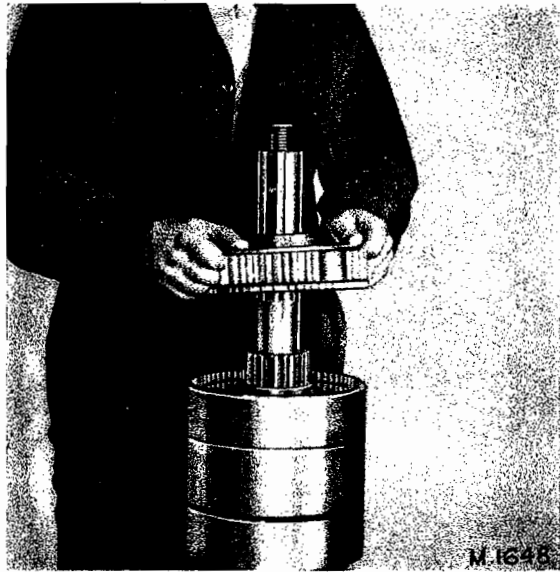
FITTING THE SUB-ASSEMBLY OF THE 1st SPEED PLANETS
